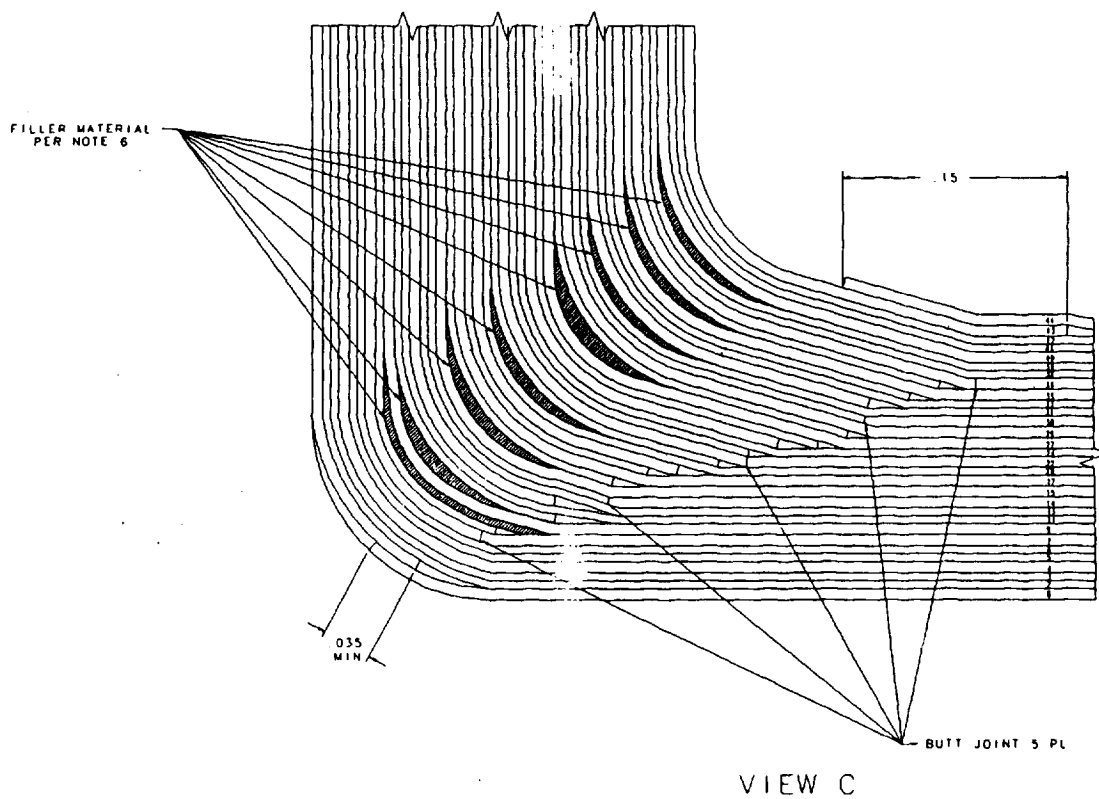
Flange Weight Optimization using Ply Drop Offs in Flange Radius [7].
